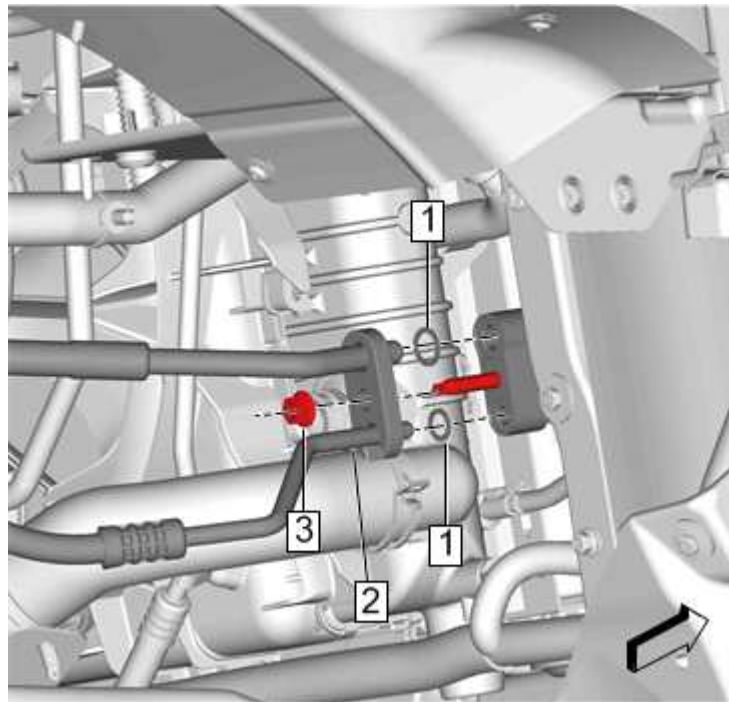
Air Conditioning Compressor Hoses And Evaporator Tube
